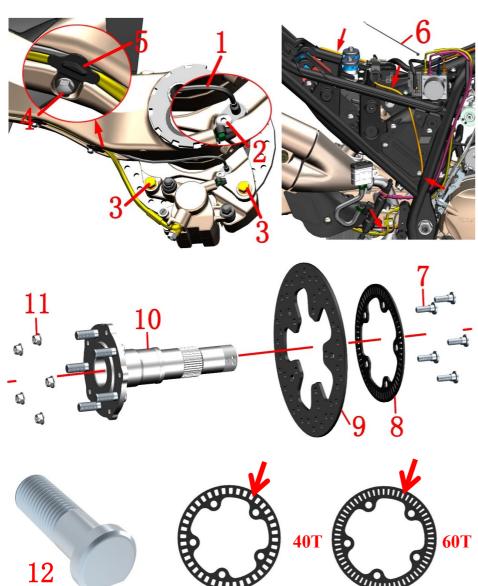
Re	ear wheel, swinging	Rear axle assembly	CHK	(0)
